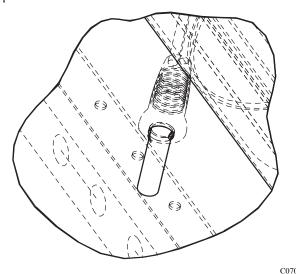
SAT, RAT and OAT Thermistor Mounting
